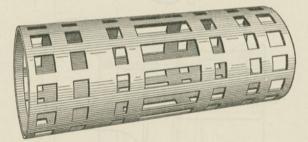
Bushing of Piston-Valve Seat, Vauclain Compound Locomotive.
